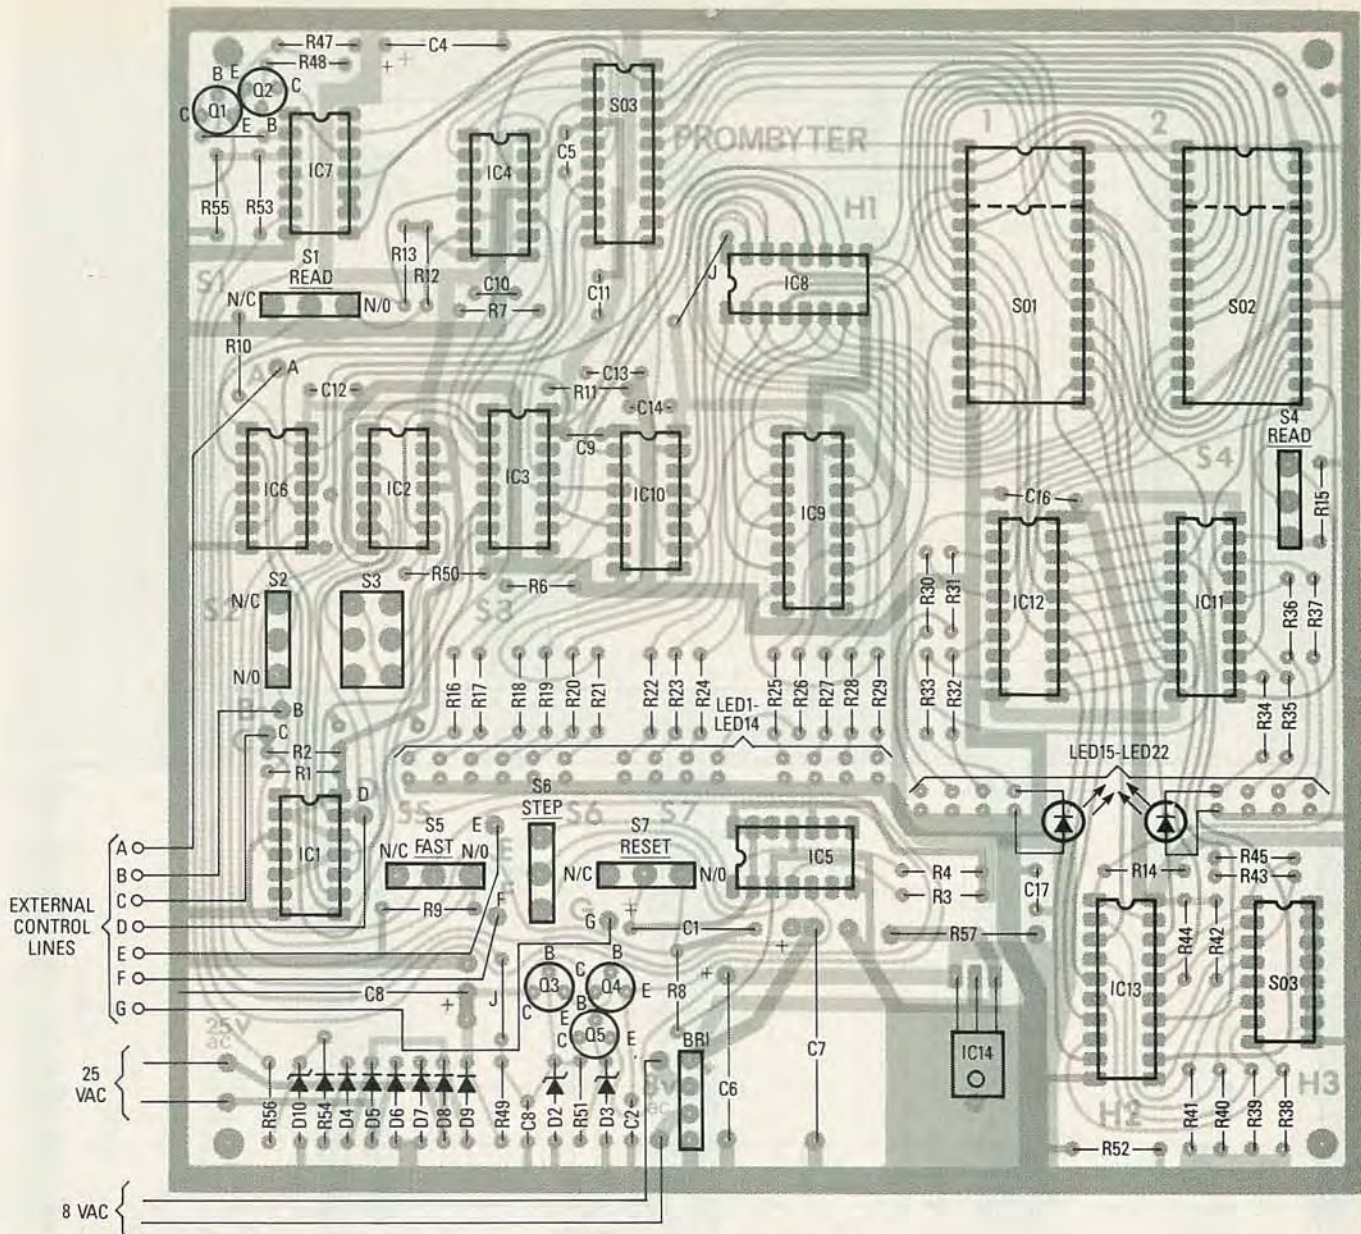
THE EPROM PROGRAMMER'S PC BOARD is double-sided; all components mount as shown here. Since a home-made board's holes are not plated through, the IC sockets must be mounted slightly above the board so that the socket pins can be soldered to the top side of the board.
